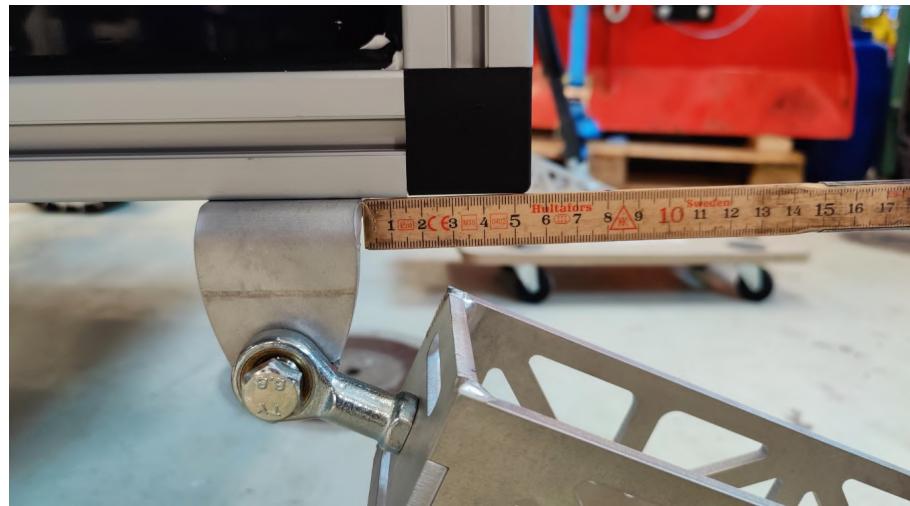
Rear Support Arm (RSA) bracket mounting position 5 cm from edge.
